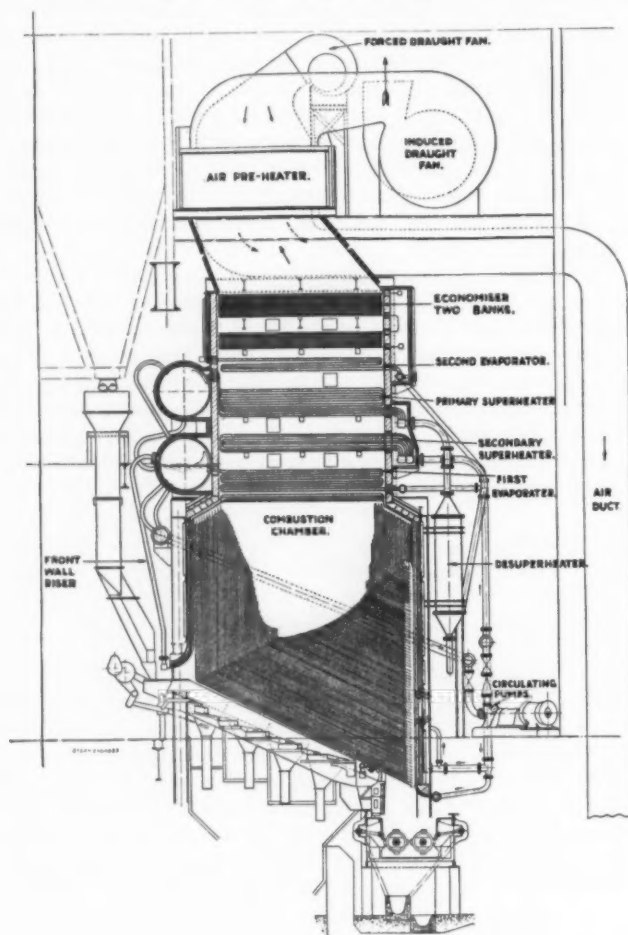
VERTICAL CROSS SECTION OF LA MONT BOILER INSTALLATION
